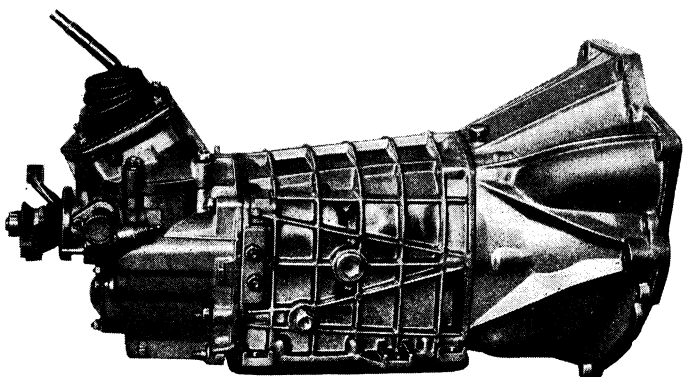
Right hand side view of 1500 Cabriolet transmission assembly.
